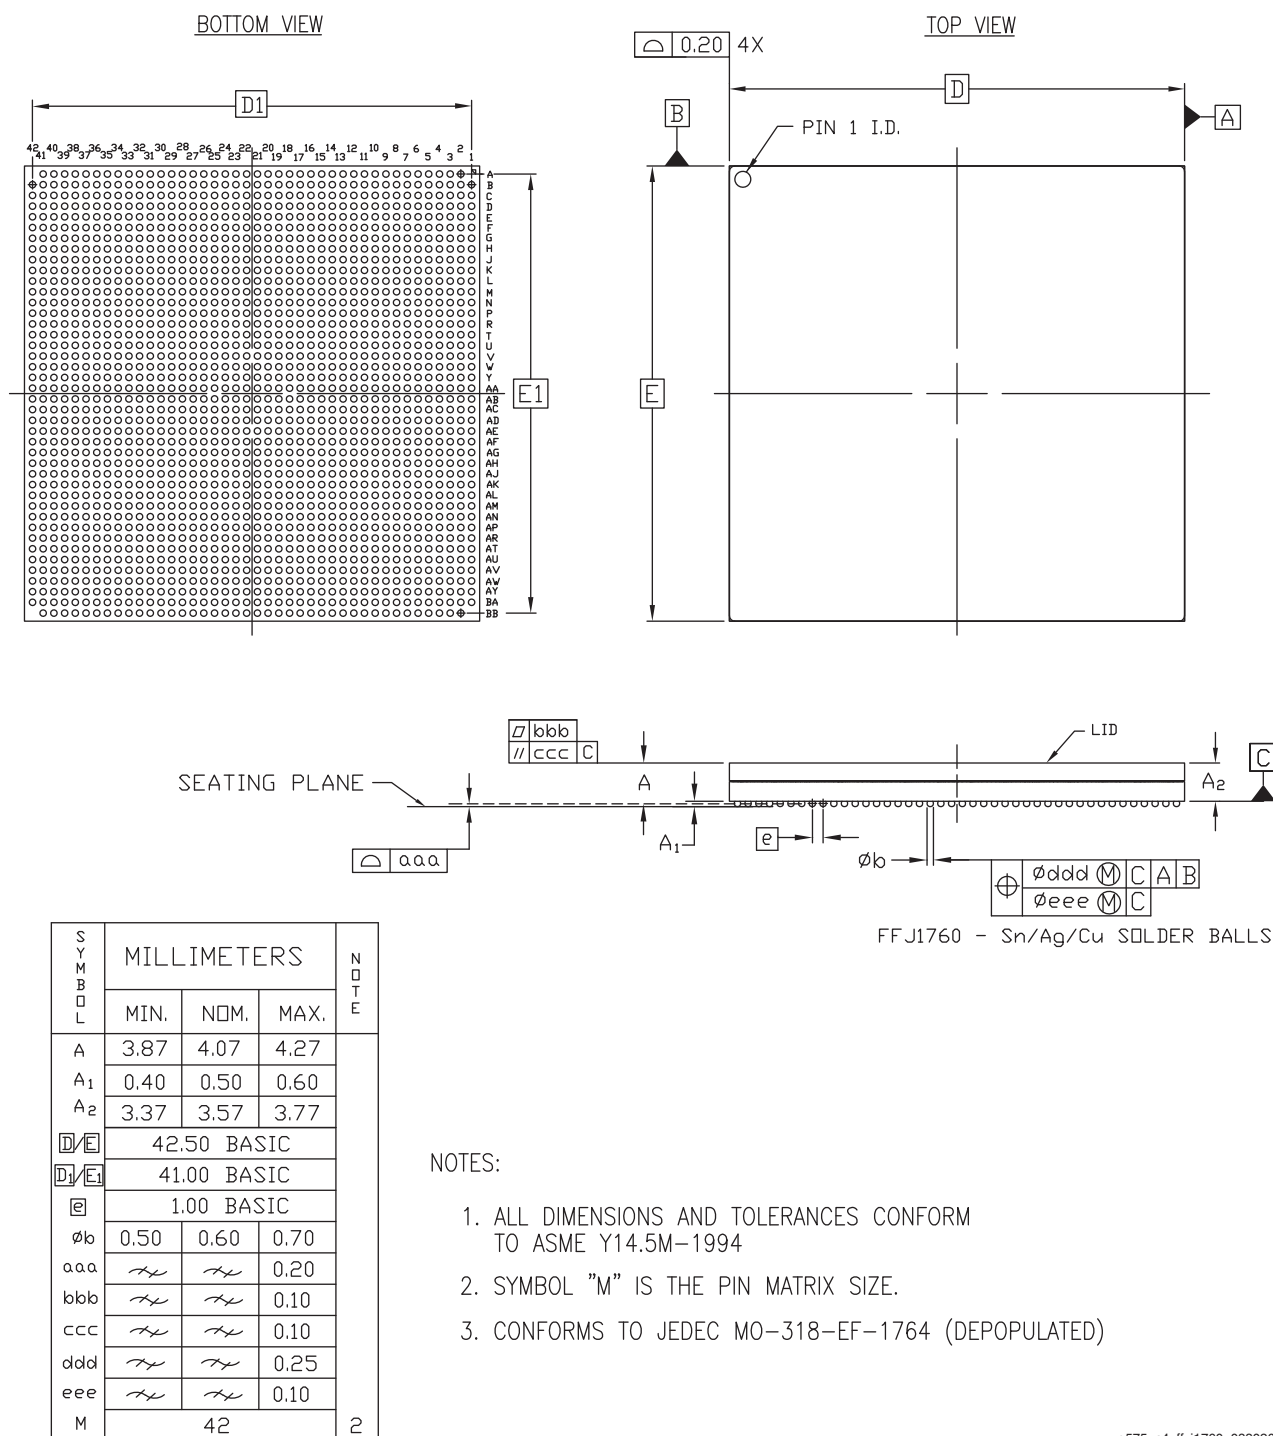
Package Dimensions for FFVE1760 (XCKU15P)
